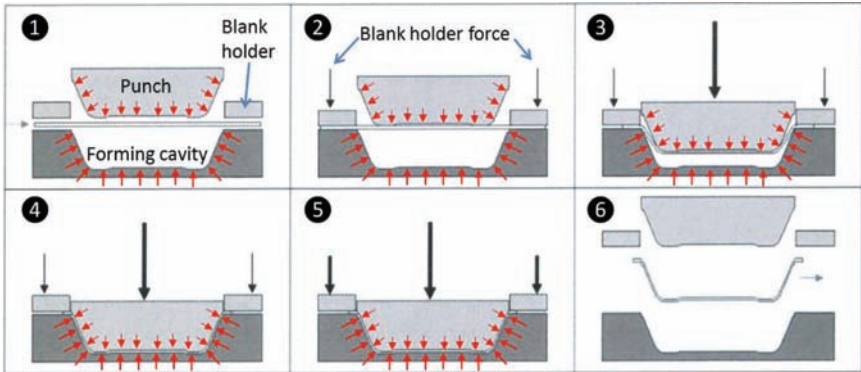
Illustration of the pressure due to the blank holder force when the paperboard blank is drawn into the forming cavity.
